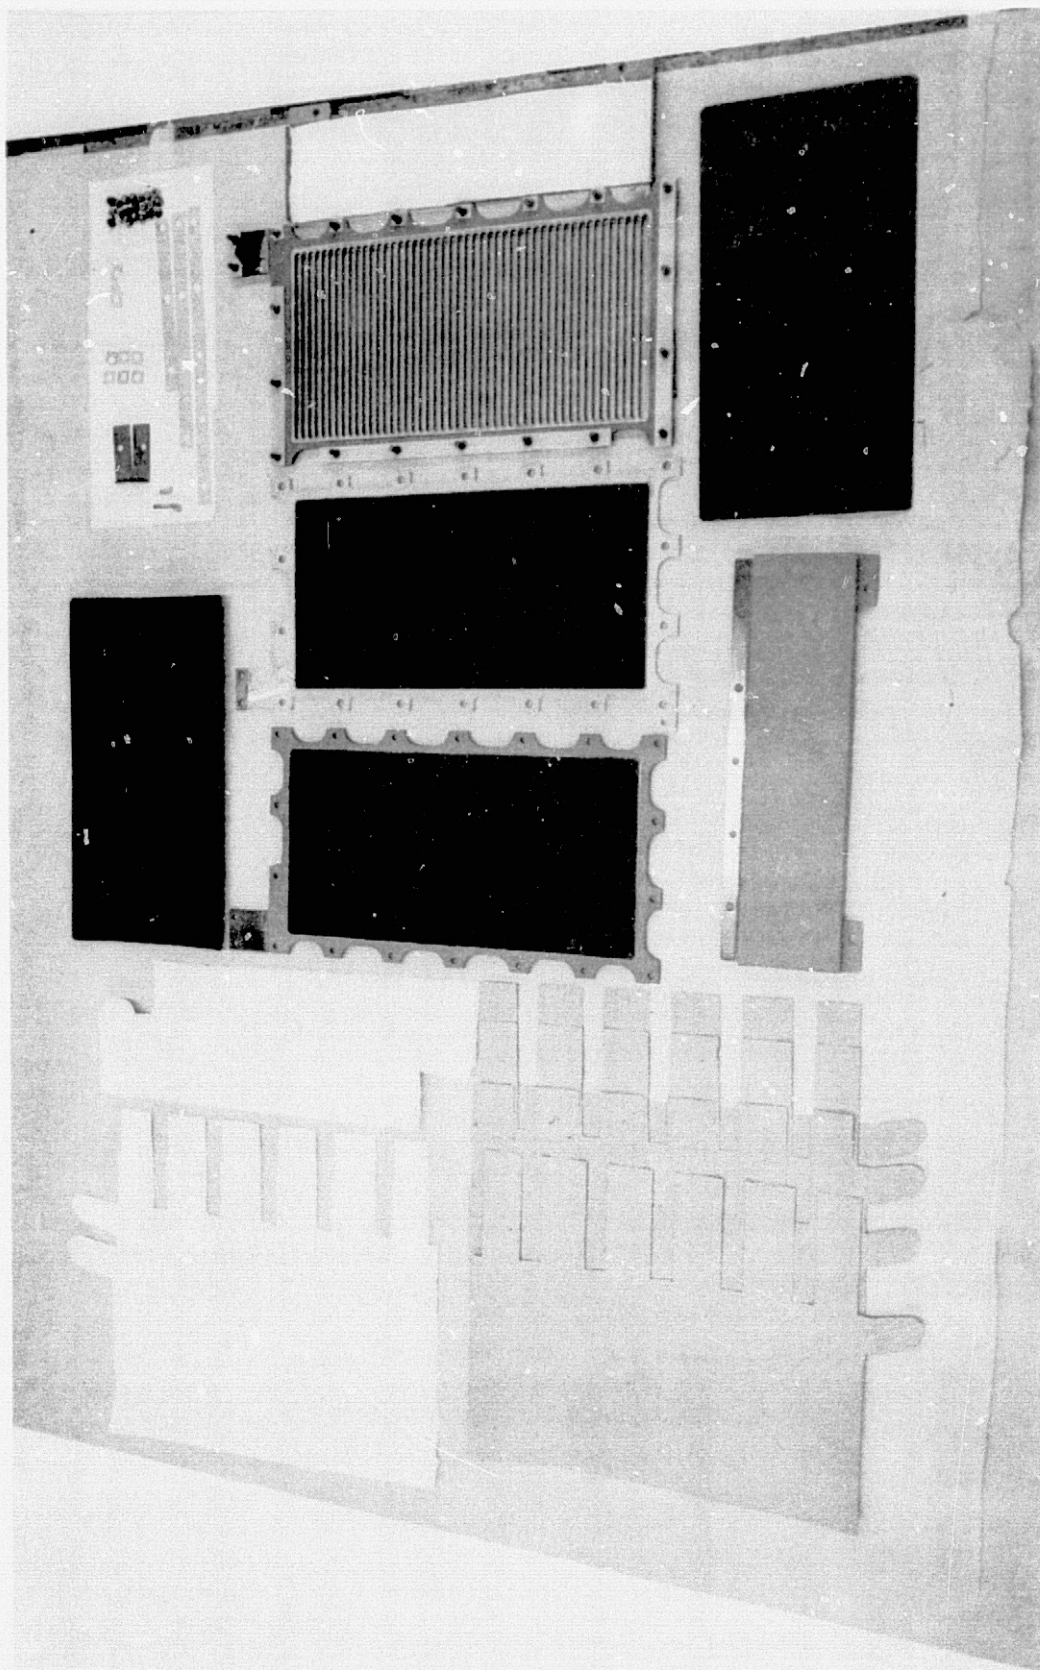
DETAILED CELL PAIR HARDWARE LAYOUT
